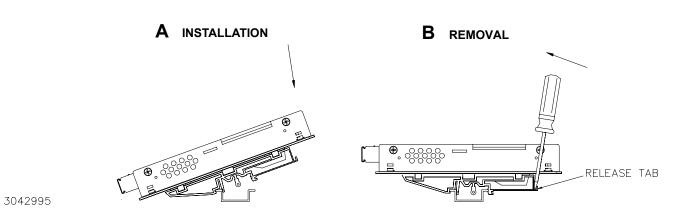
INSTALLATION AND REMOVAL OF POWER SUPPLY FROM DIN RAIL
